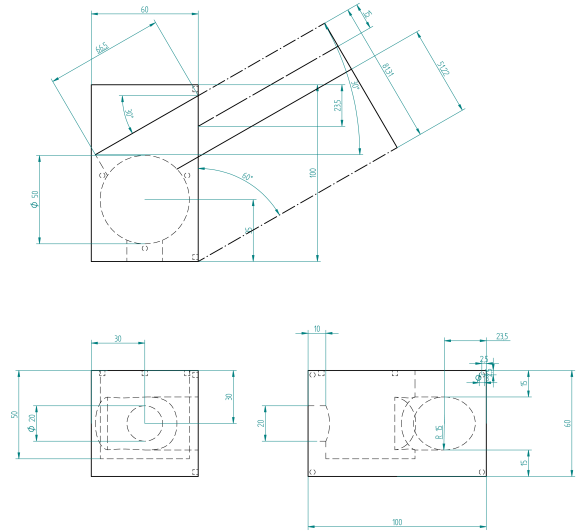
This technical drawing illustrates the servo plate. It also shows technical drawings of the New Power XL-9HM servo. The dimensions of the servo and the plastic that comes with each new servo have been determined by carefully measuring a servo with a digital caliper and then reconstructing it with Solid Edge ST4.
